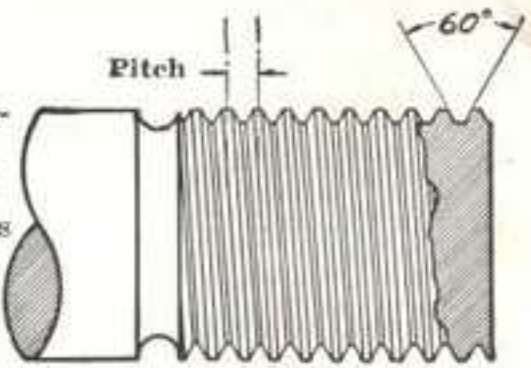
2.5 mm. Pitch Metric Screw Thread
